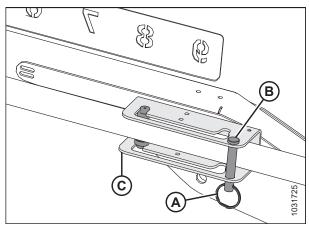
Fore-Aft Cylinder Adjustment Type 2 – Forward Position
